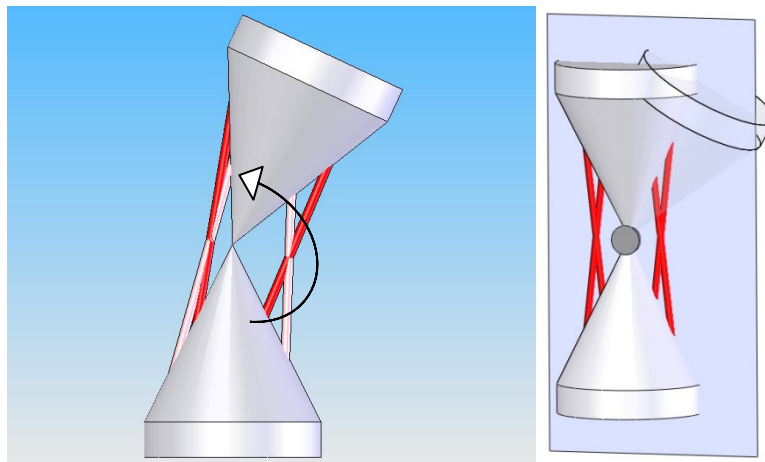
Instance 2 upper limb will move from tilted right back to upright position.
